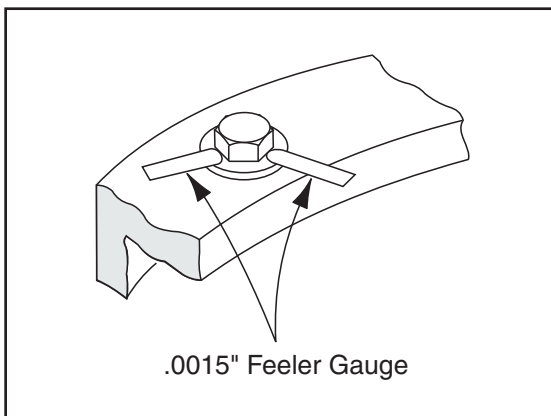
Swing Bearing Bolt Feeler Gauge Check
